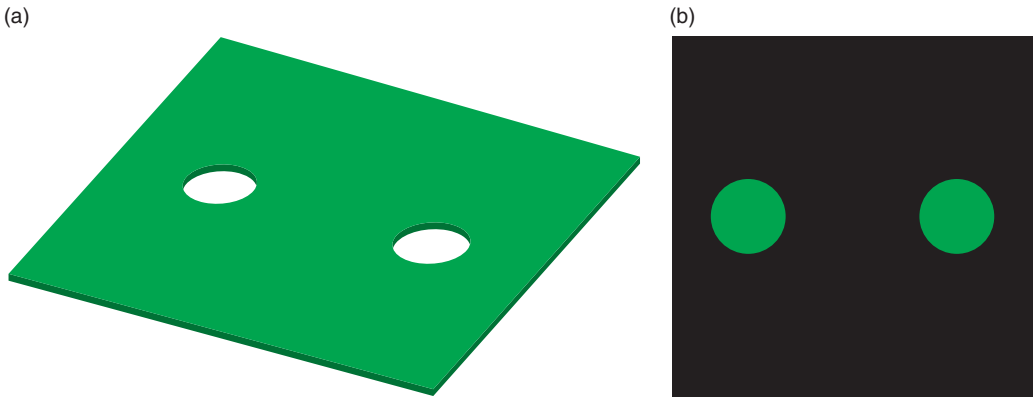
Soldermask layer and negative view. (a) Soldermask. (b) Negative view in Layout.
